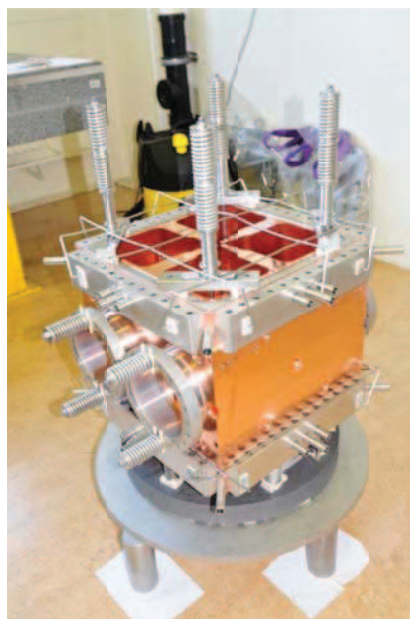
Assembly of the first module of the prototype for the second vertical brazing step.
